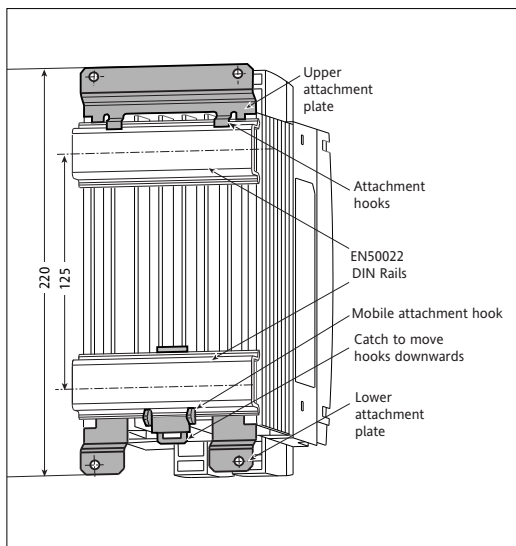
Attaching the 7300A ≤ 40A units to DIN rails
